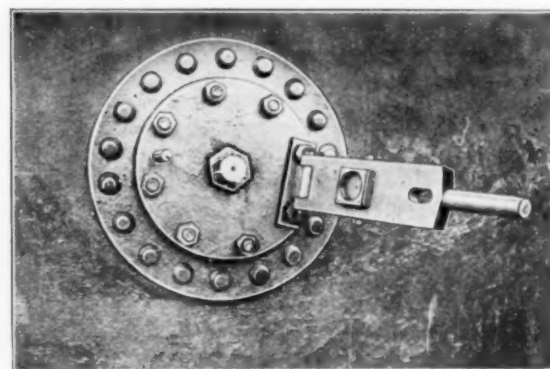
SPECIAL VALVE FOR CLOSING NOZZLE
